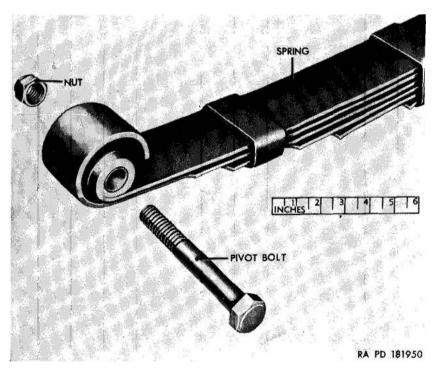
(Added) Pivot bolt and pivot bolt end of spring M170—Exploded view.
